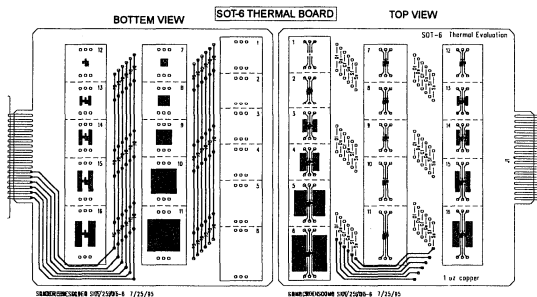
Both Sides of the 4.5"x5" SuperSOT™-6 Thermal Board. Complete scale drawings is shown in section 5.
